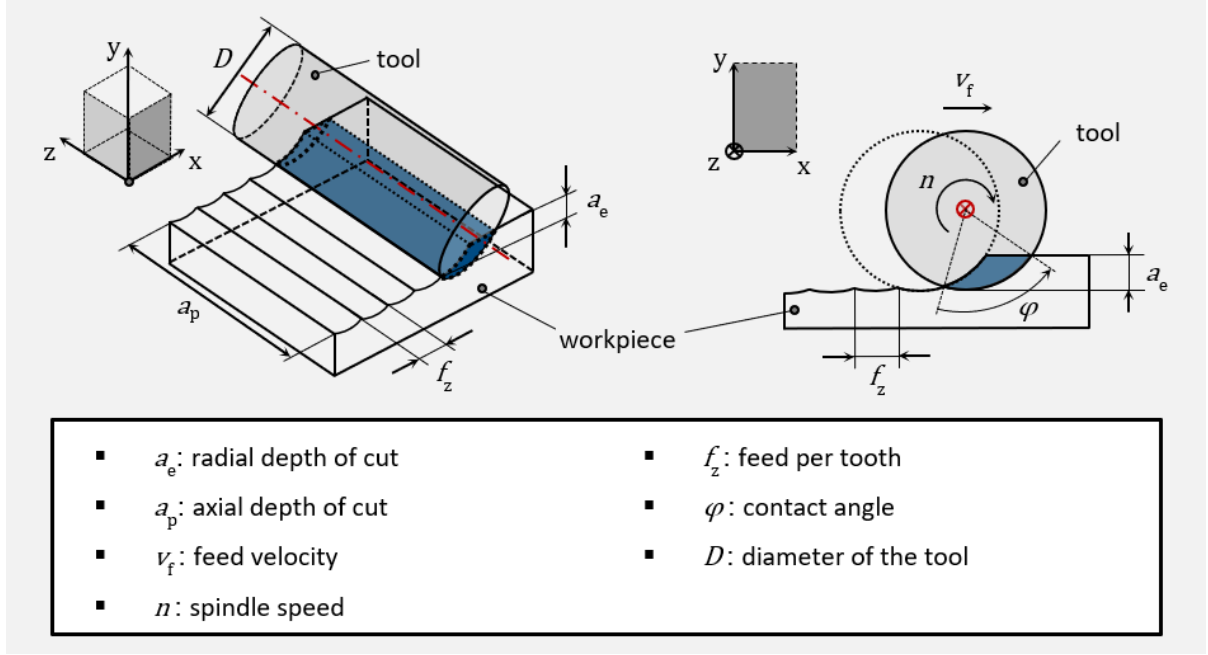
Macroscopic engagement conditions for peripheral milling
